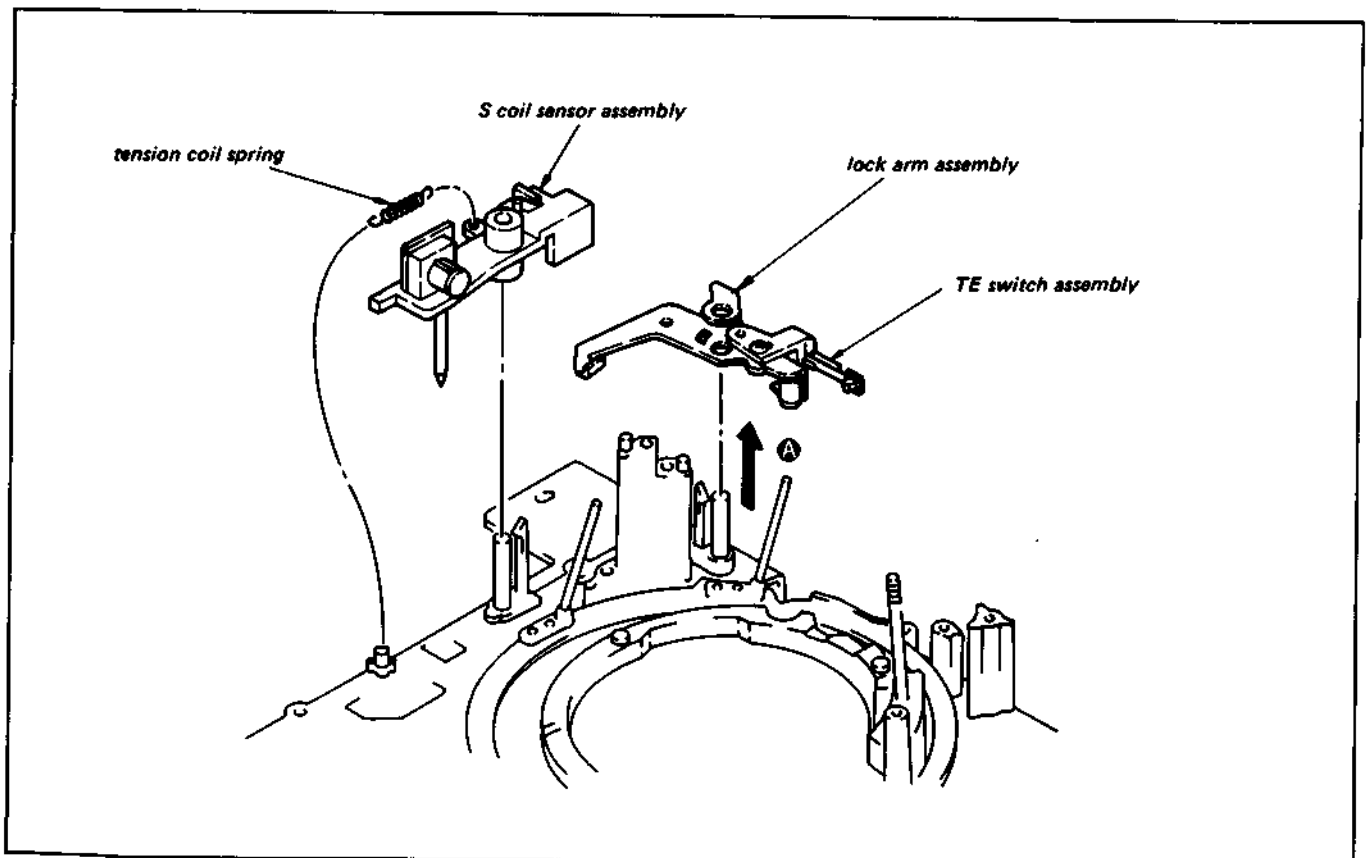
Removal of the TE switch assembly and lock arm assembly
